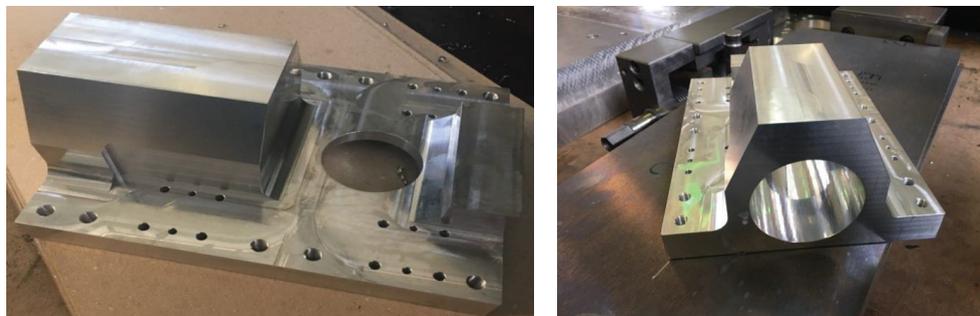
A machined part after the third clamping and the fourth clamping. Source: authors
